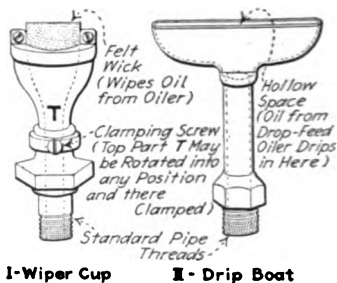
Oil collecting devices. (Sherwood Mfg. Co.)
